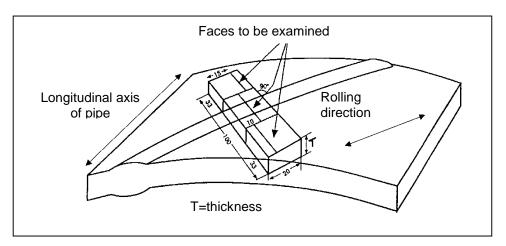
Weld Area of Spiral-Welded Pipe (All Dimensions in mm [1 in = 25.4 mm])
